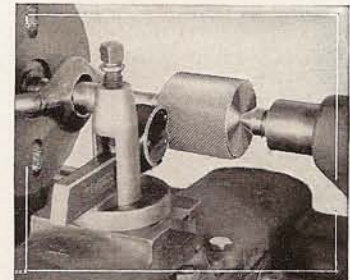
Knurling a Large Handle Between Centers in the 16-inch South Bend Lathe.
